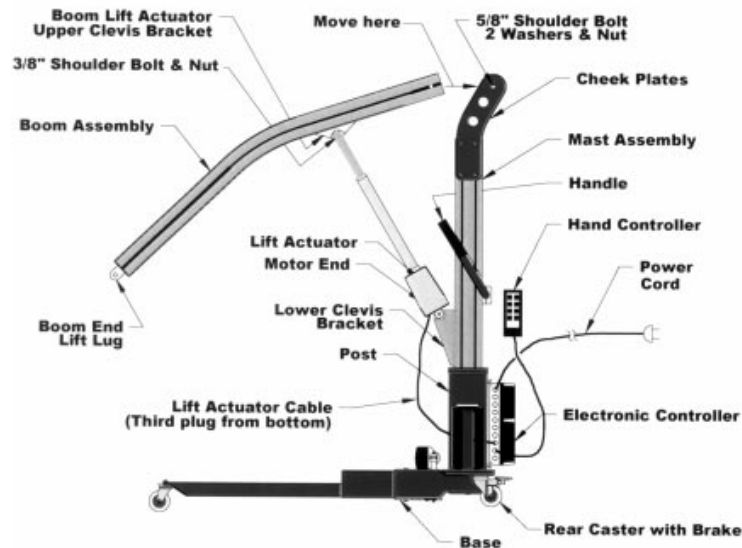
(Base, Mast, Lift Actuator & Boom Assembly)
